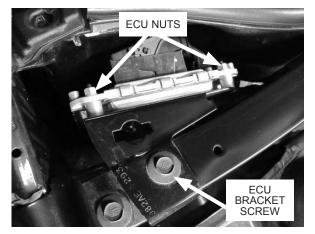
d: Remove ECU nuts and remove cross bar screws
